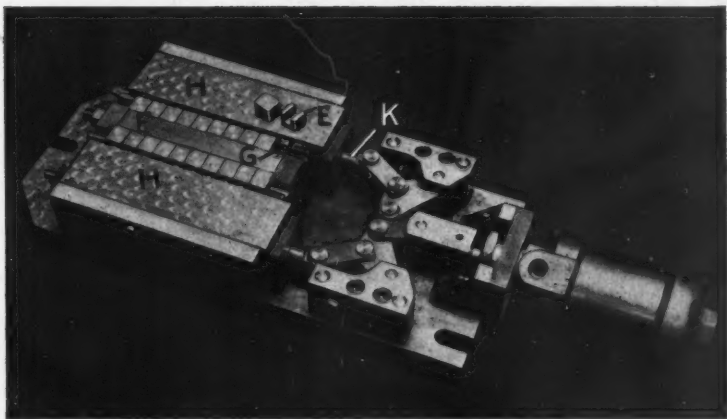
Designed and built by the company, this air/hydraulic fixture provides for holding 20 small slide carriers for a slot-milling operation
